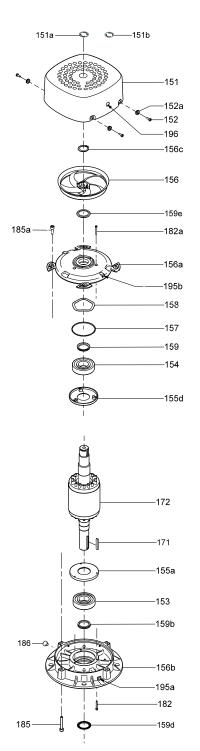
Detail from fig. 29, exploded view of the MGE-F
